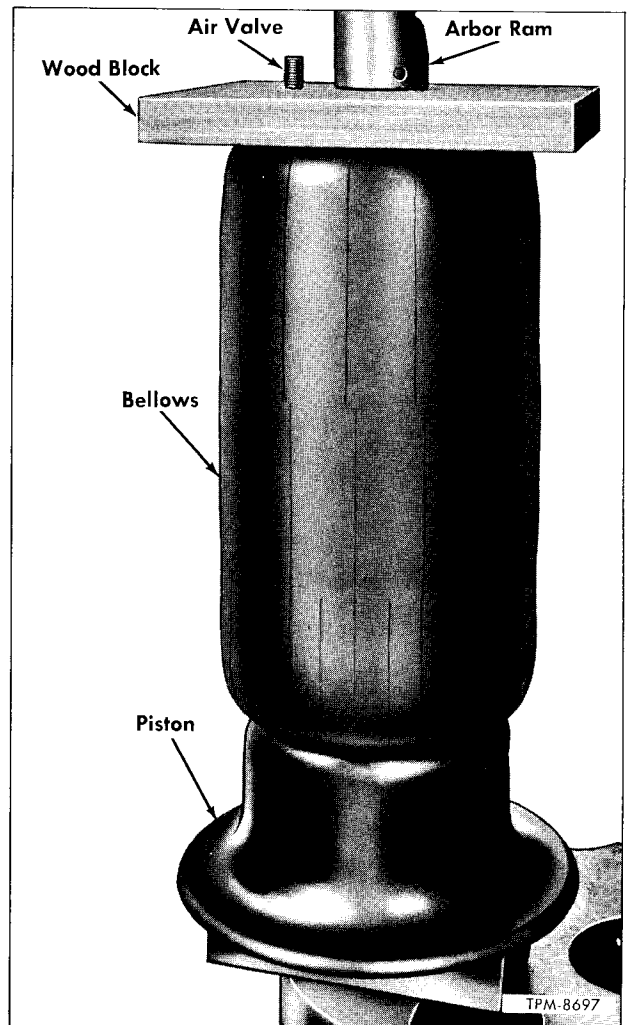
Forming Bellows Loop over Piston Using Arbor Press
